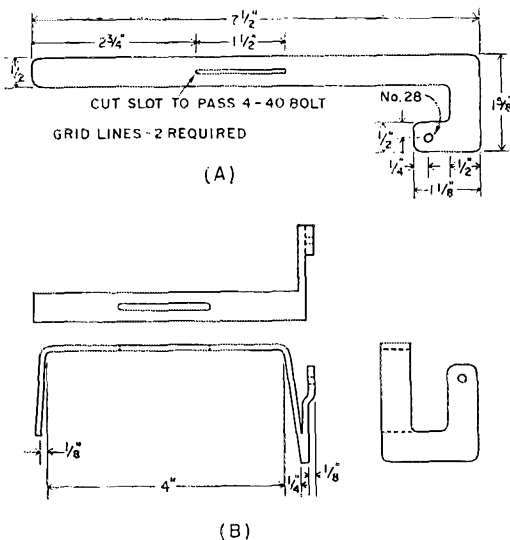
Details of the sheet-copper grid circuit used in the 4X250B amplifier. The piece is shown before bending (A), and in its final form (B).
